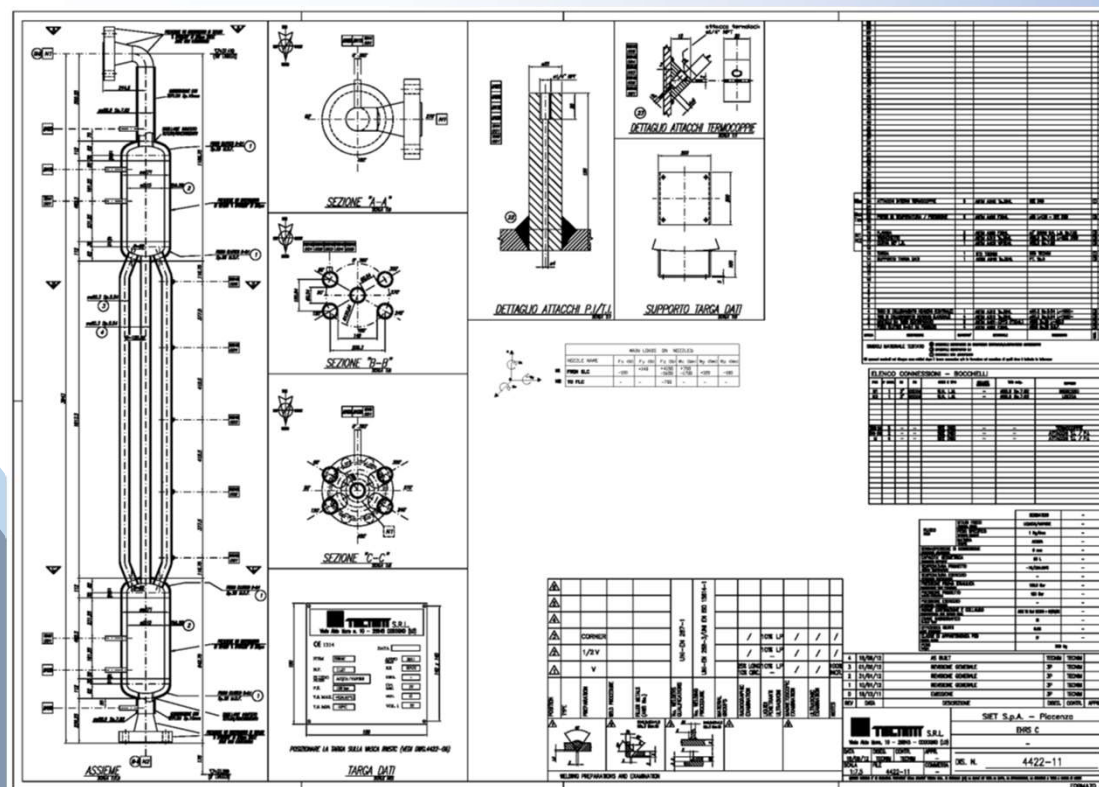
Rev.4 Sheet 3 of 7
